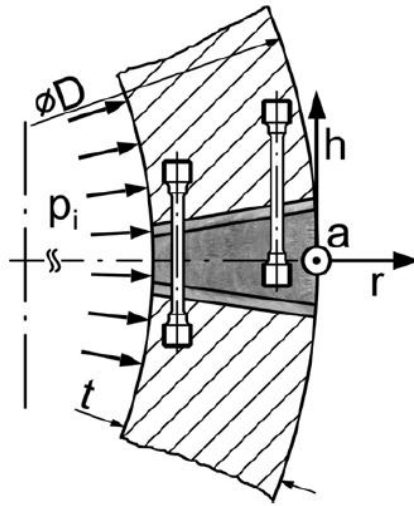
Cross-weld creep specimens containing all or some parts of the weldment (Maile, 2003)
